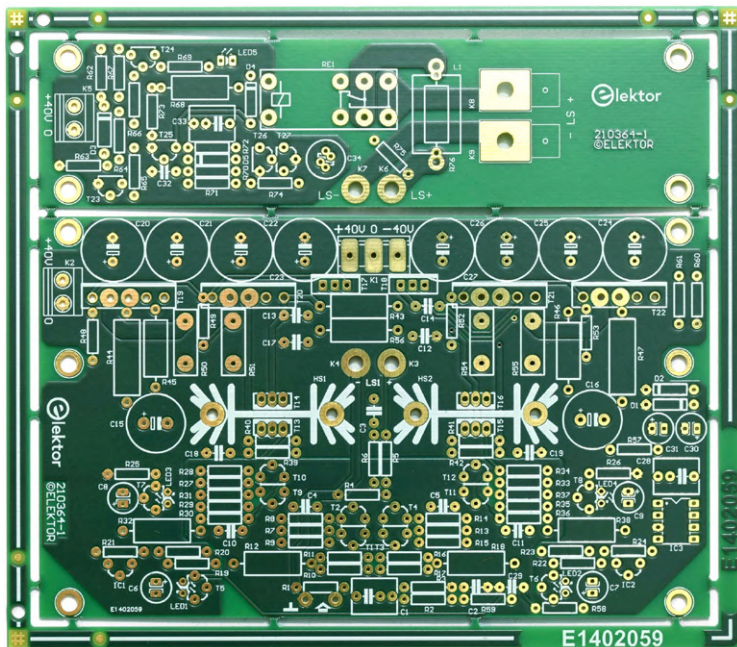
The double-sided, through-hole-plated circuit board of the prototype. The PCB layouts of the two separate boards are available for download [3].
